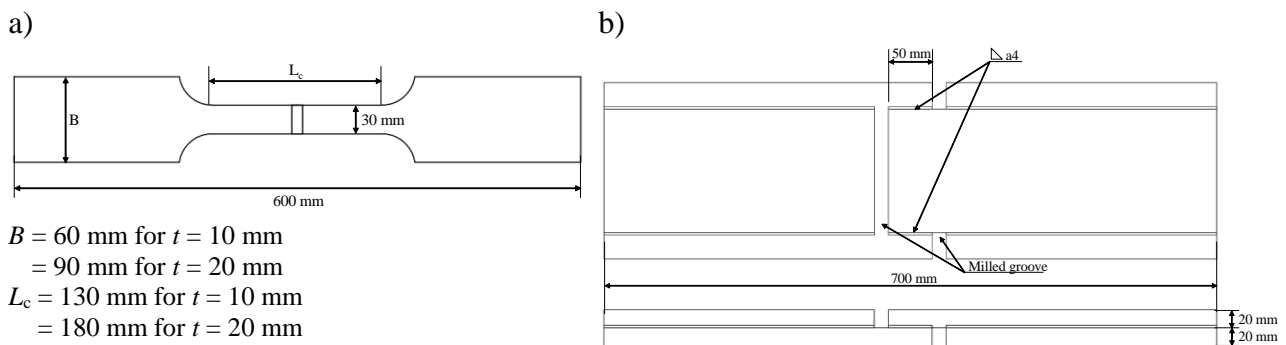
Geometry of welded test specimens a) butt weld and b) longitudinal fillet weld
